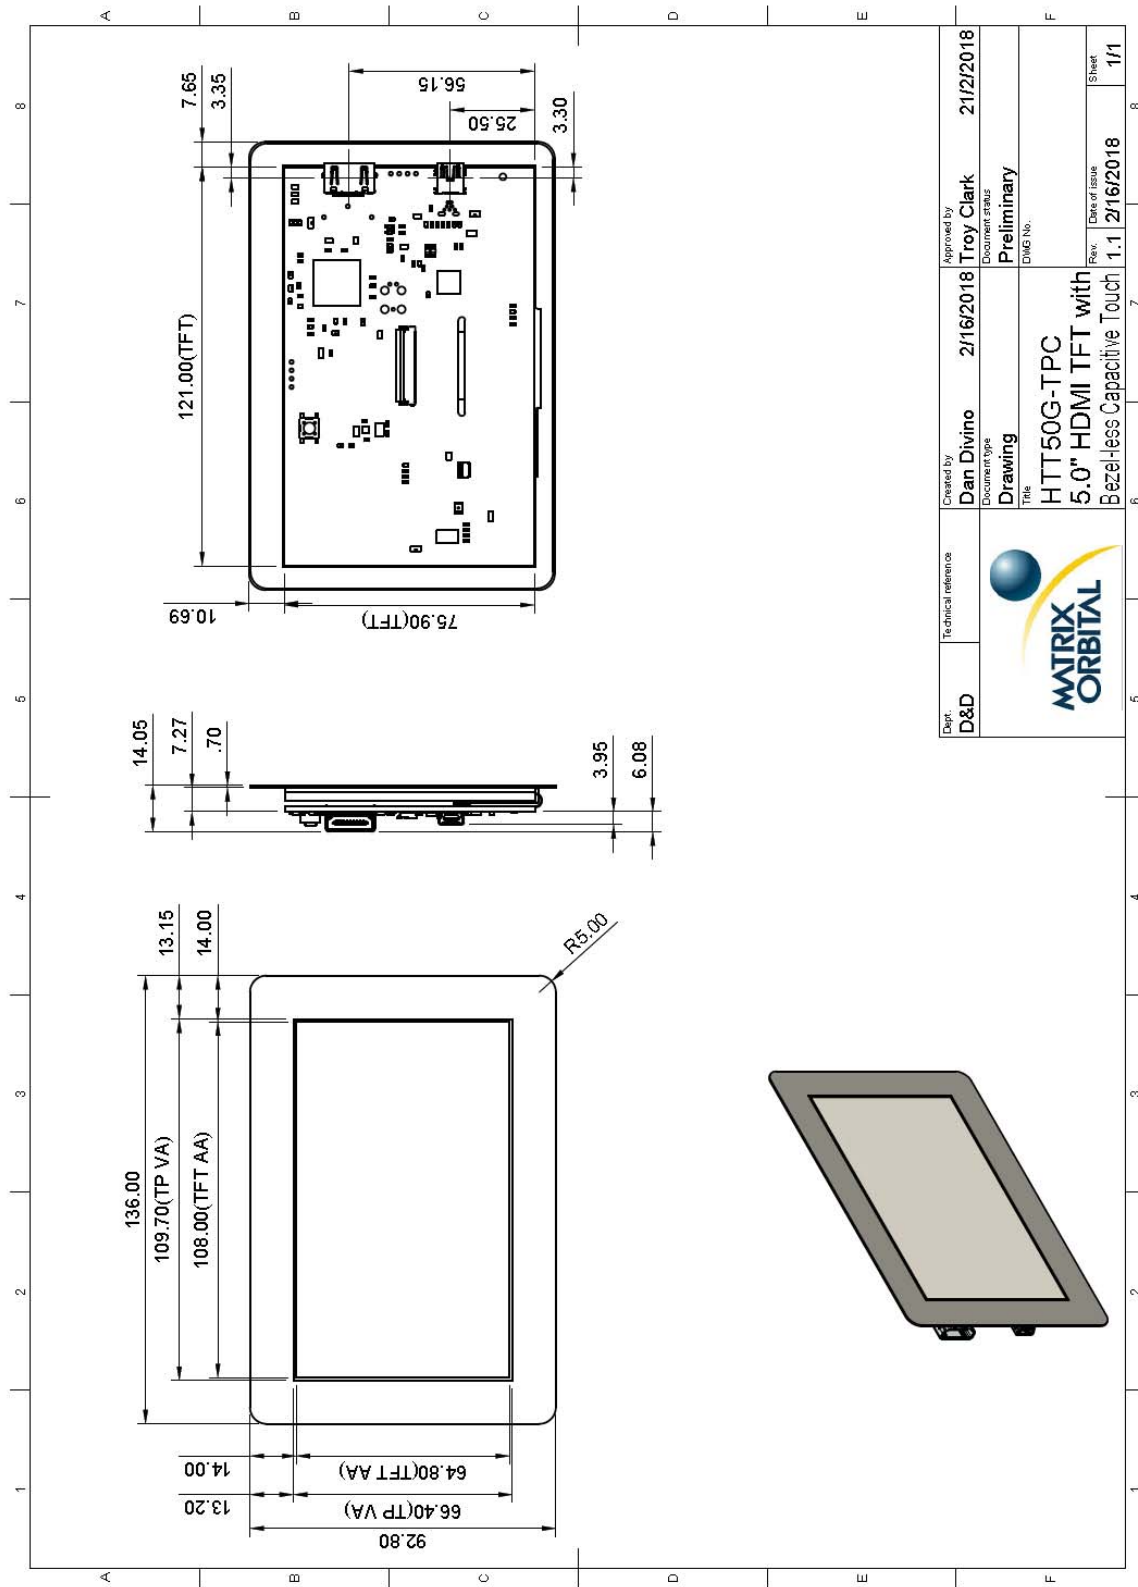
Bezel-less Capacitive Touch Panel HTT50G Dimensional Drawing
